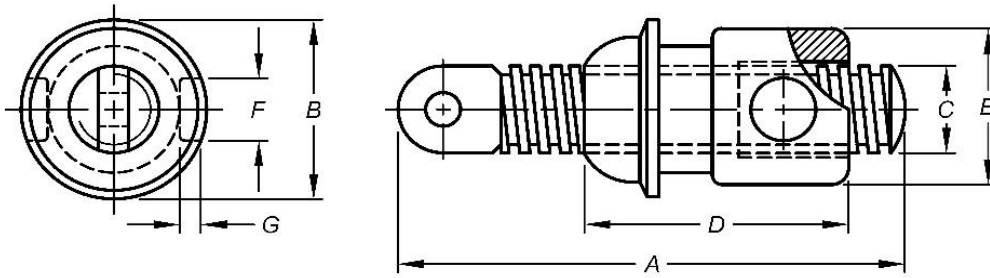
DIMENSIONS FOR SCREW-NUT ASSEMBLY
